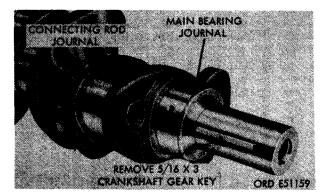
REMOVING OR INSTALLING CRANKSHAFT GEAR KEY (LATE MODEL ENGINES).
